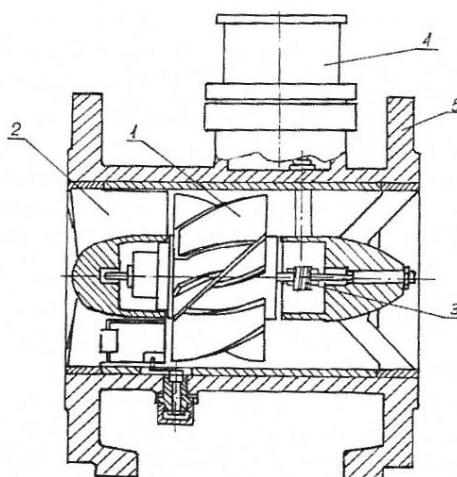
Screw counter: 1 – rotor, 2 – guide vanes, 3 – worm gear, 4 – counting mechanism, 5 – housing
